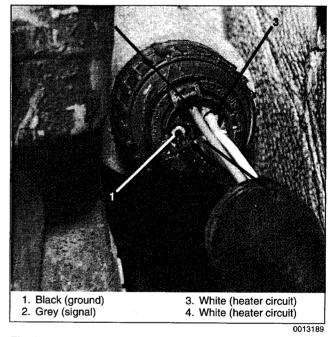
Oxygen sensor connector terminal identification (sensor side). Terminals numbers are molded into connector.
